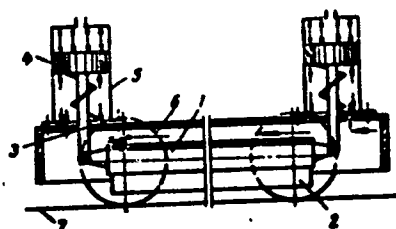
1 - chamber; 2 - gasket; 3 - rod; 4 - piston;
